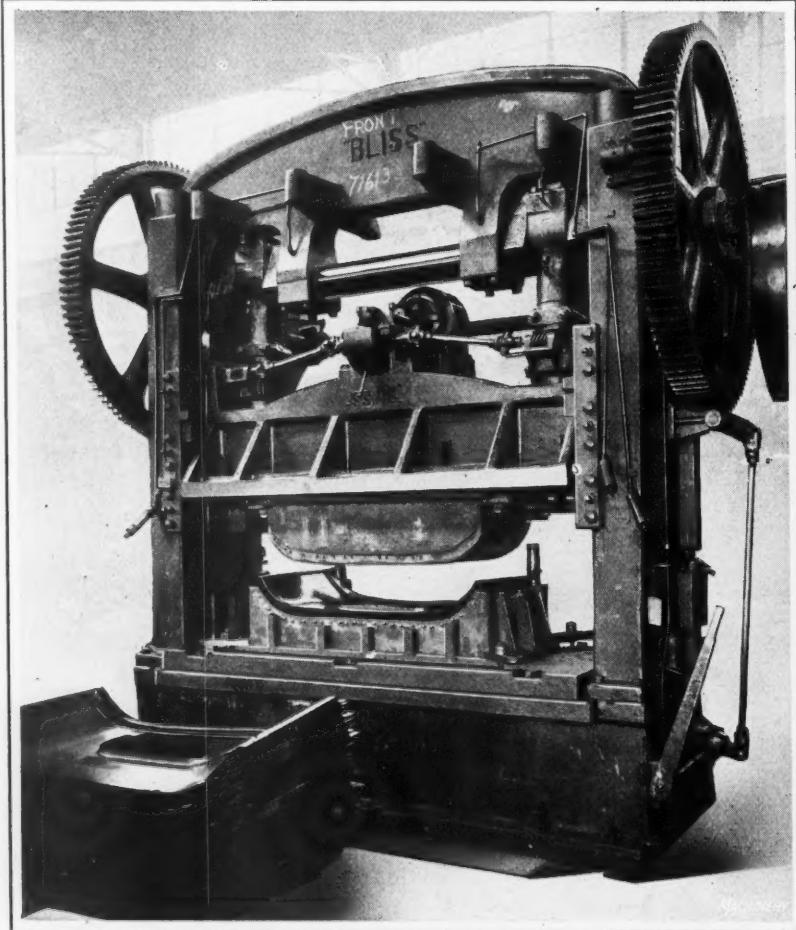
Trimming and flanging the Edges of a Sedan Body Part and blanking and flanging the Window
